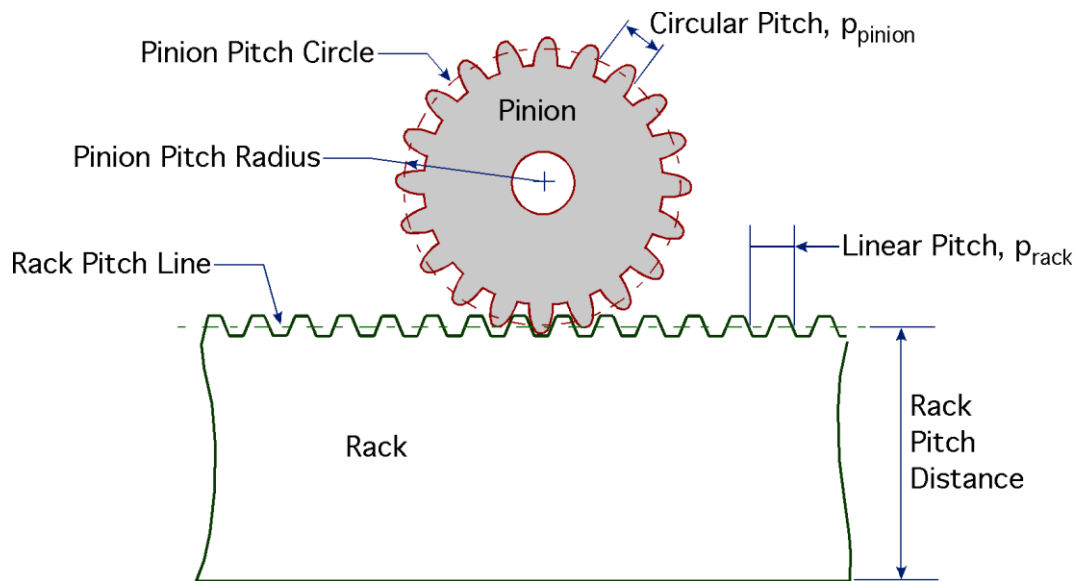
Kinematic Definitions for Rack and Pinion Gearset
